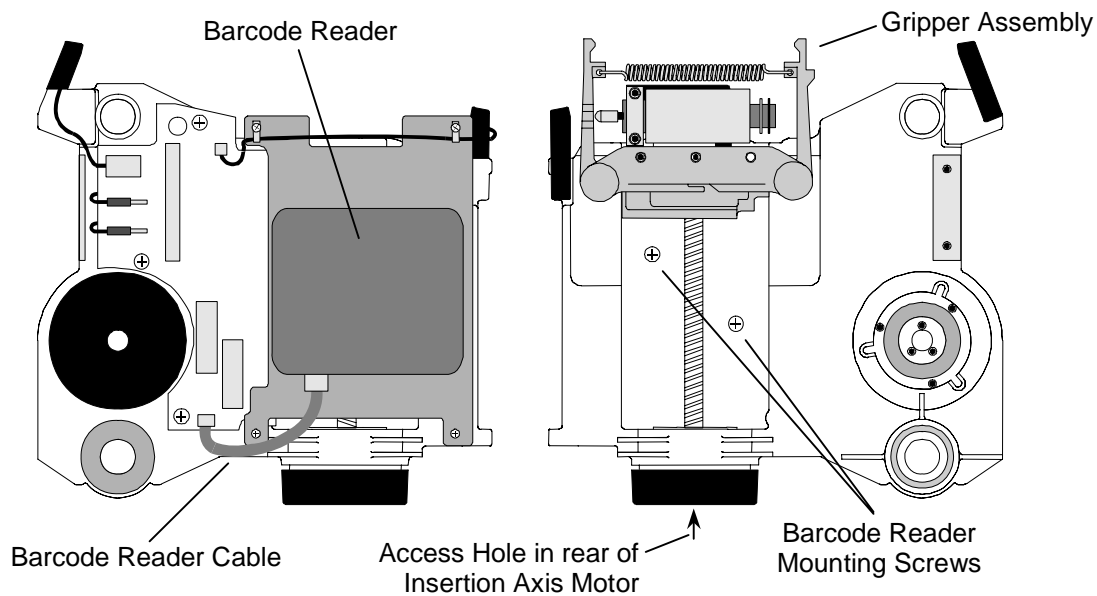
Barcode Reader (TLS-180/360 Model Shown)
